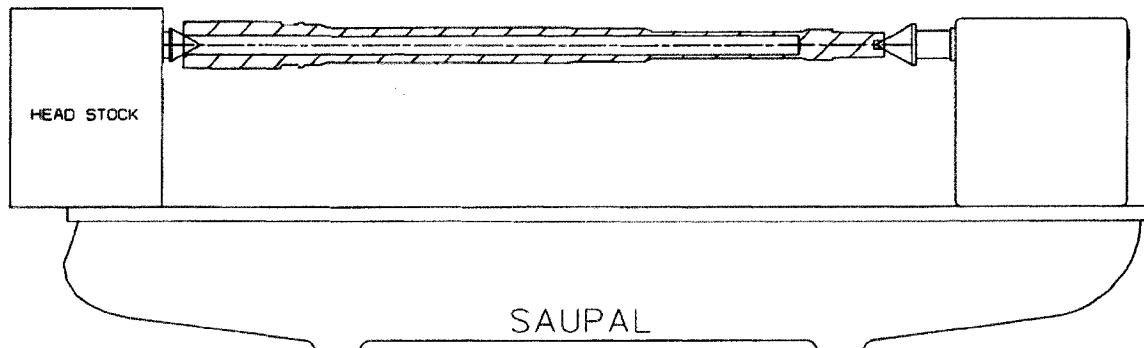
SAUPAL Ultrasonic Inspection Machine
